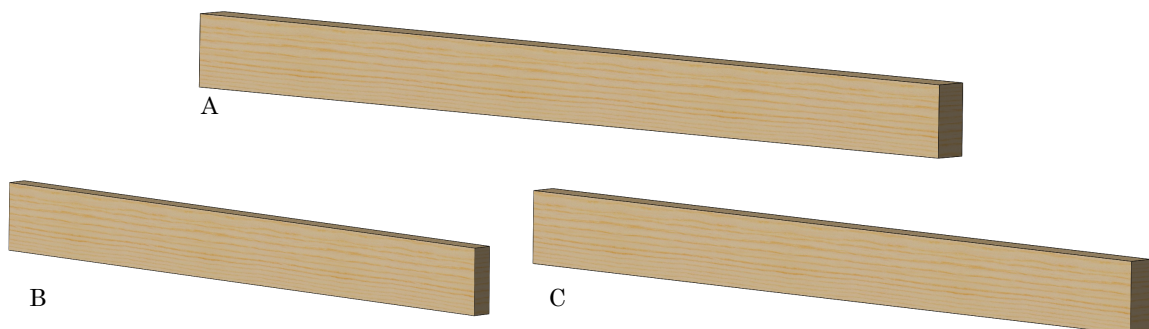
A: Base beam. B: Cross beam. C: Stiffener beam.
